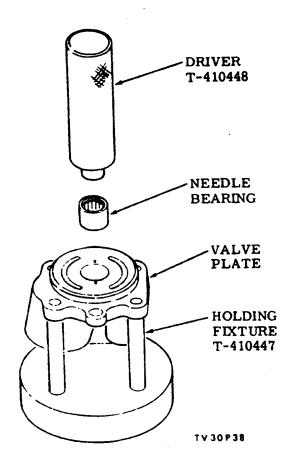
Assembly of Needle Bearing in Valve Plate
